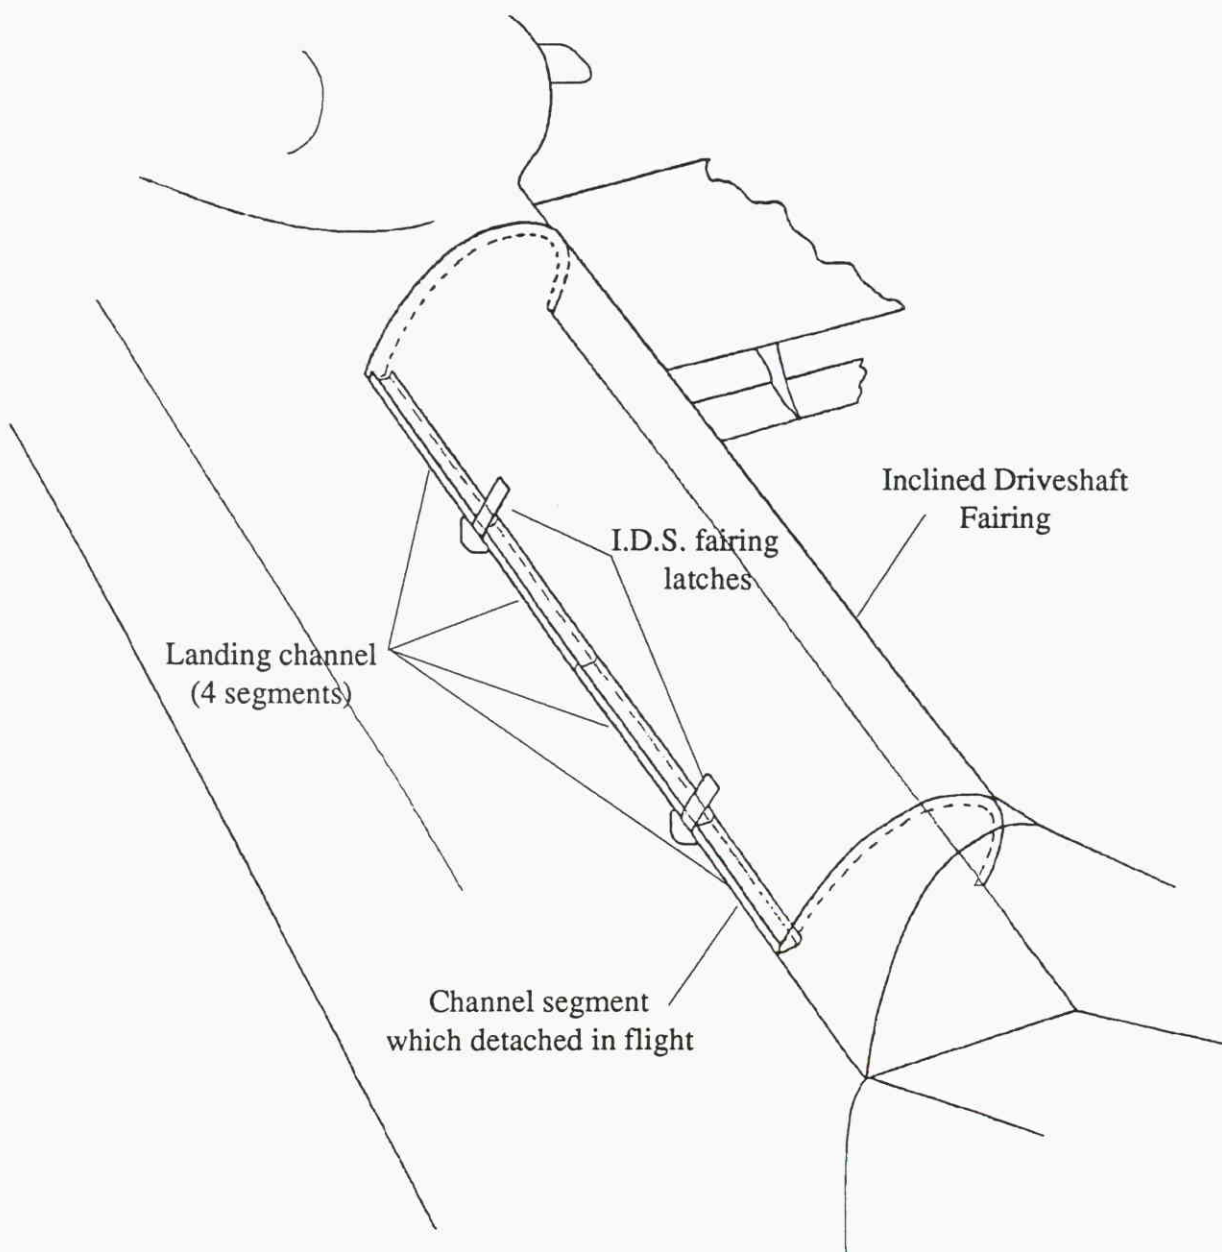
Detail of Inclined Driveshaft Fairing latching edge
